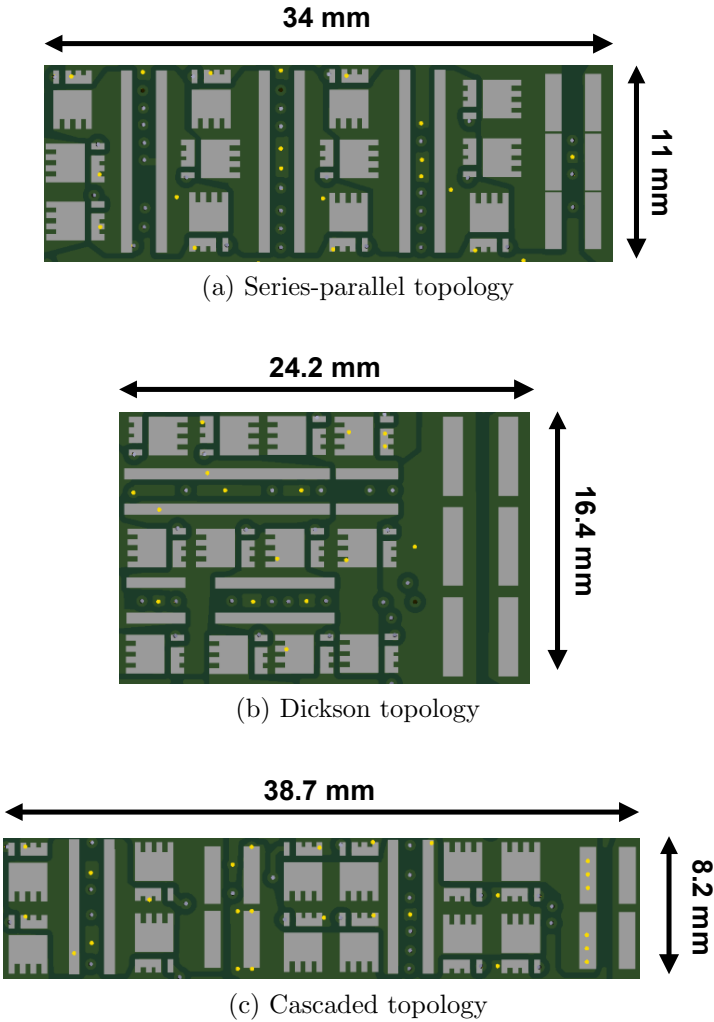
PCB layout of 4-to-1 hybrid SC type-I topologies.
